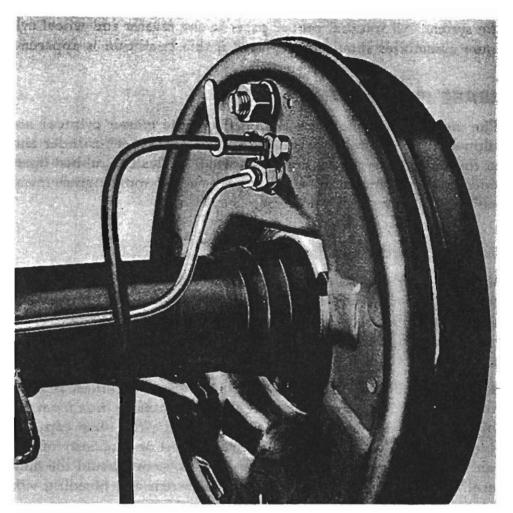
Using the Bleeder Wrench J-627, Back Off the Bleeder One Full Turn.
